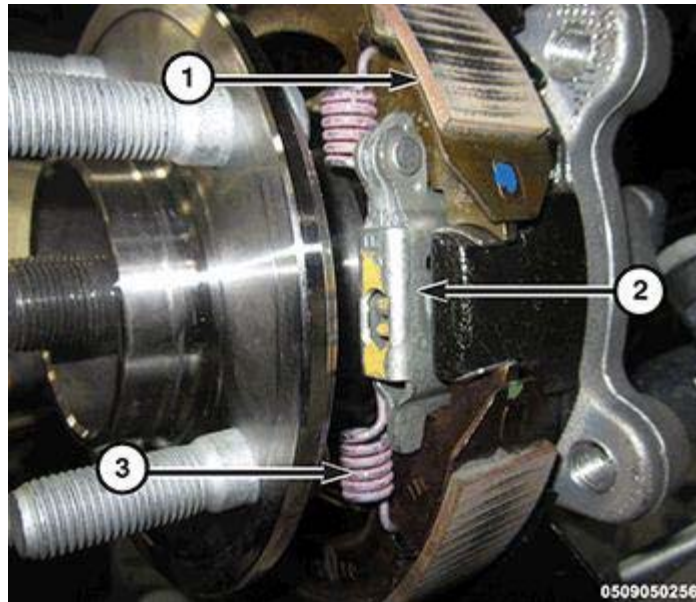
Upper Shoe, Actuator Lever & Return Spring
